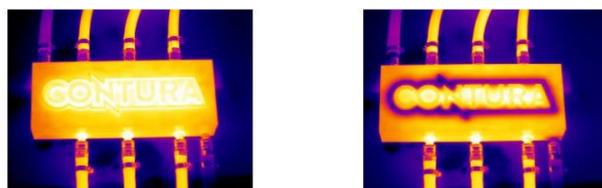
Thermal Photo of Heating and Cooling Phase of the mould insert
